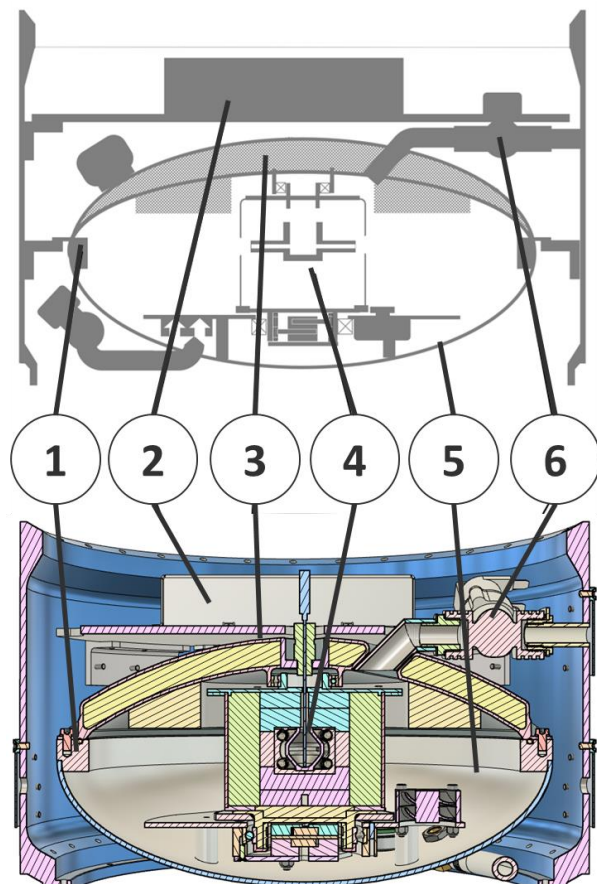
IMFEX concept: Schematic view (Top) and CAD rendering (Bottom); (1) – Fixed drum, (2) – Computer compartment, (3) – Heat sink, (4) – Bushing assembly, (5) – Pressure vessel, (6) – Hot side valve
